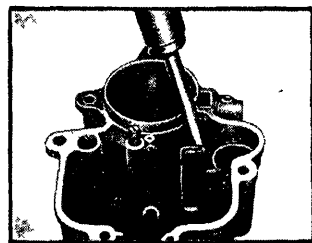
Install pump check needle and plug. Disregard this operation on models prior to 1937 as they do not have the needle and plug. 1938 models use ball and spring instead of needle
